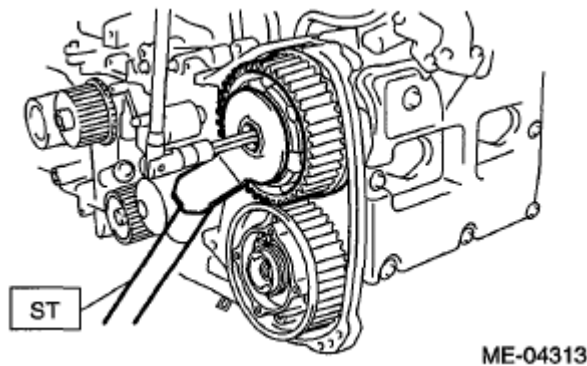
Locking Cam Sprocket And Install Cam Sprocket Bolt
